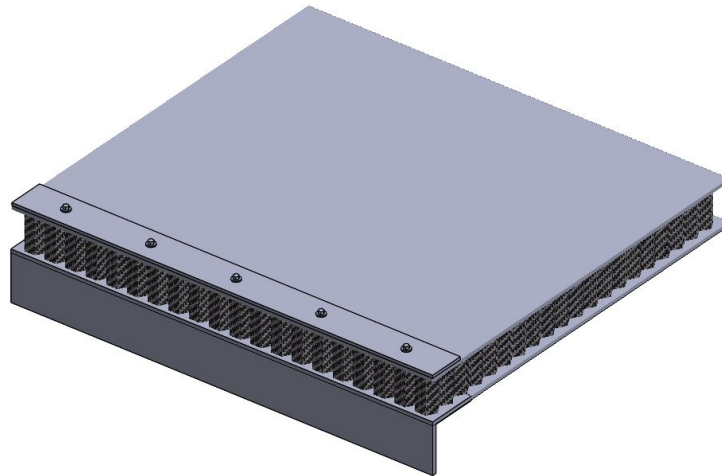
An alternative out-plane bolted joining method of honeycomb panel plate
